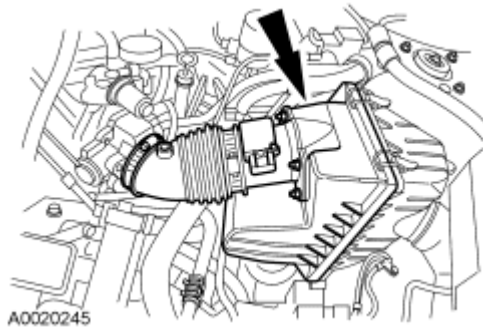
Locating Intake Tube & Air Cleaner Cover
